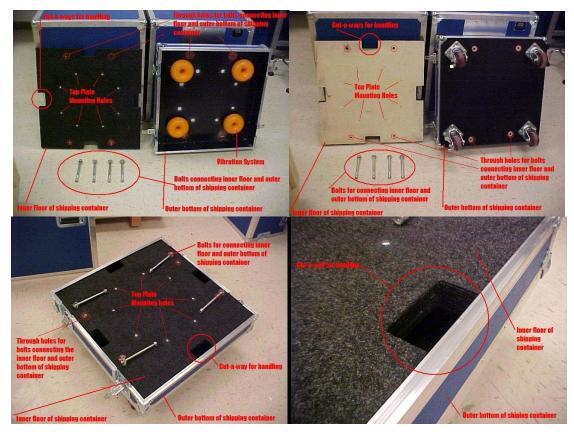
Schematic of Base of Keal Case with Inner Floor Substructure
